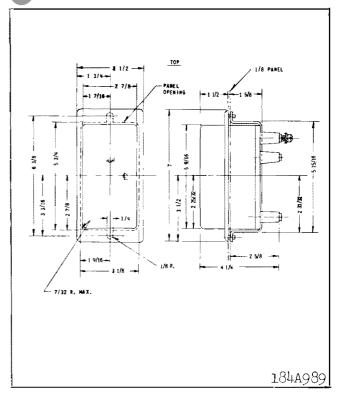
Outline and Drilling Plan for the type PM-4 Auxiliary unit in the Semi-Flush molded case.
